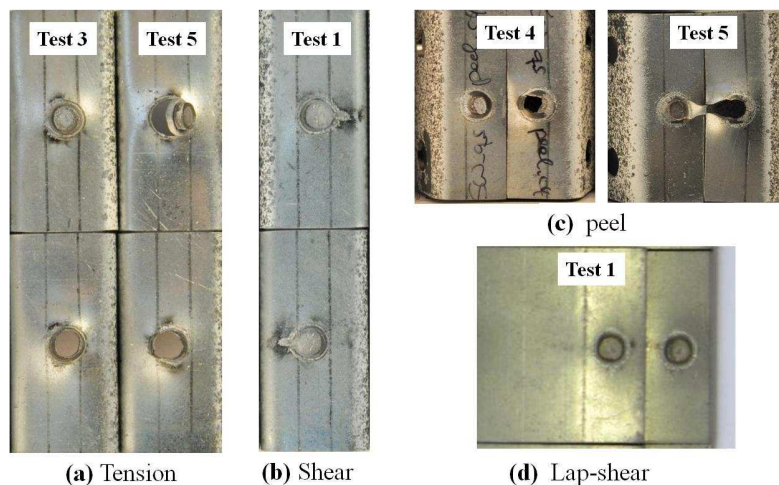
Fracture modes of spot welded joint: (a) KS2 tension, (b) KS2 shear, (c) peel, (d) lap-shear
